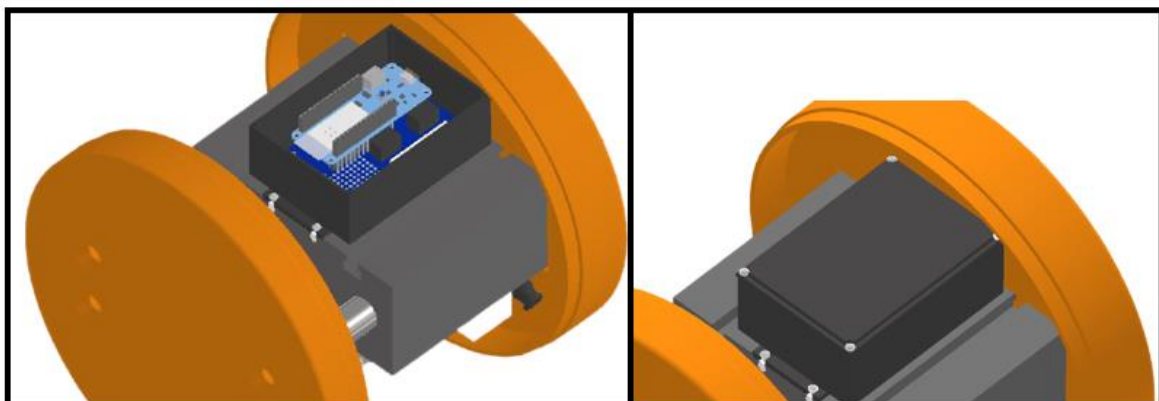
Eletrical enclosures assembly on Cylinder body.
